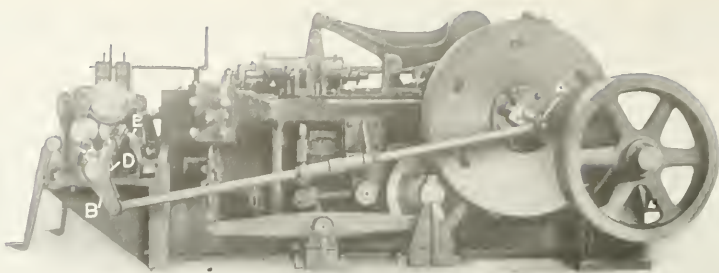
Showing Mechanism for operating Intermittent Feed Mechanism, Movable Die and Vertical Tool-slide
